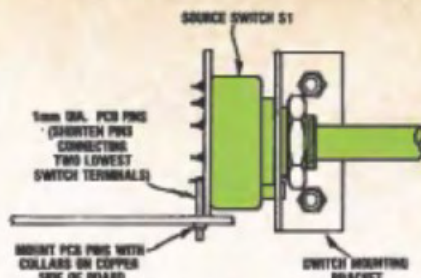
mounting detail for the selector switch assembly. Note that the PCB pins must be installed with their collars on the copper side of the phono preamplifier PCB.
